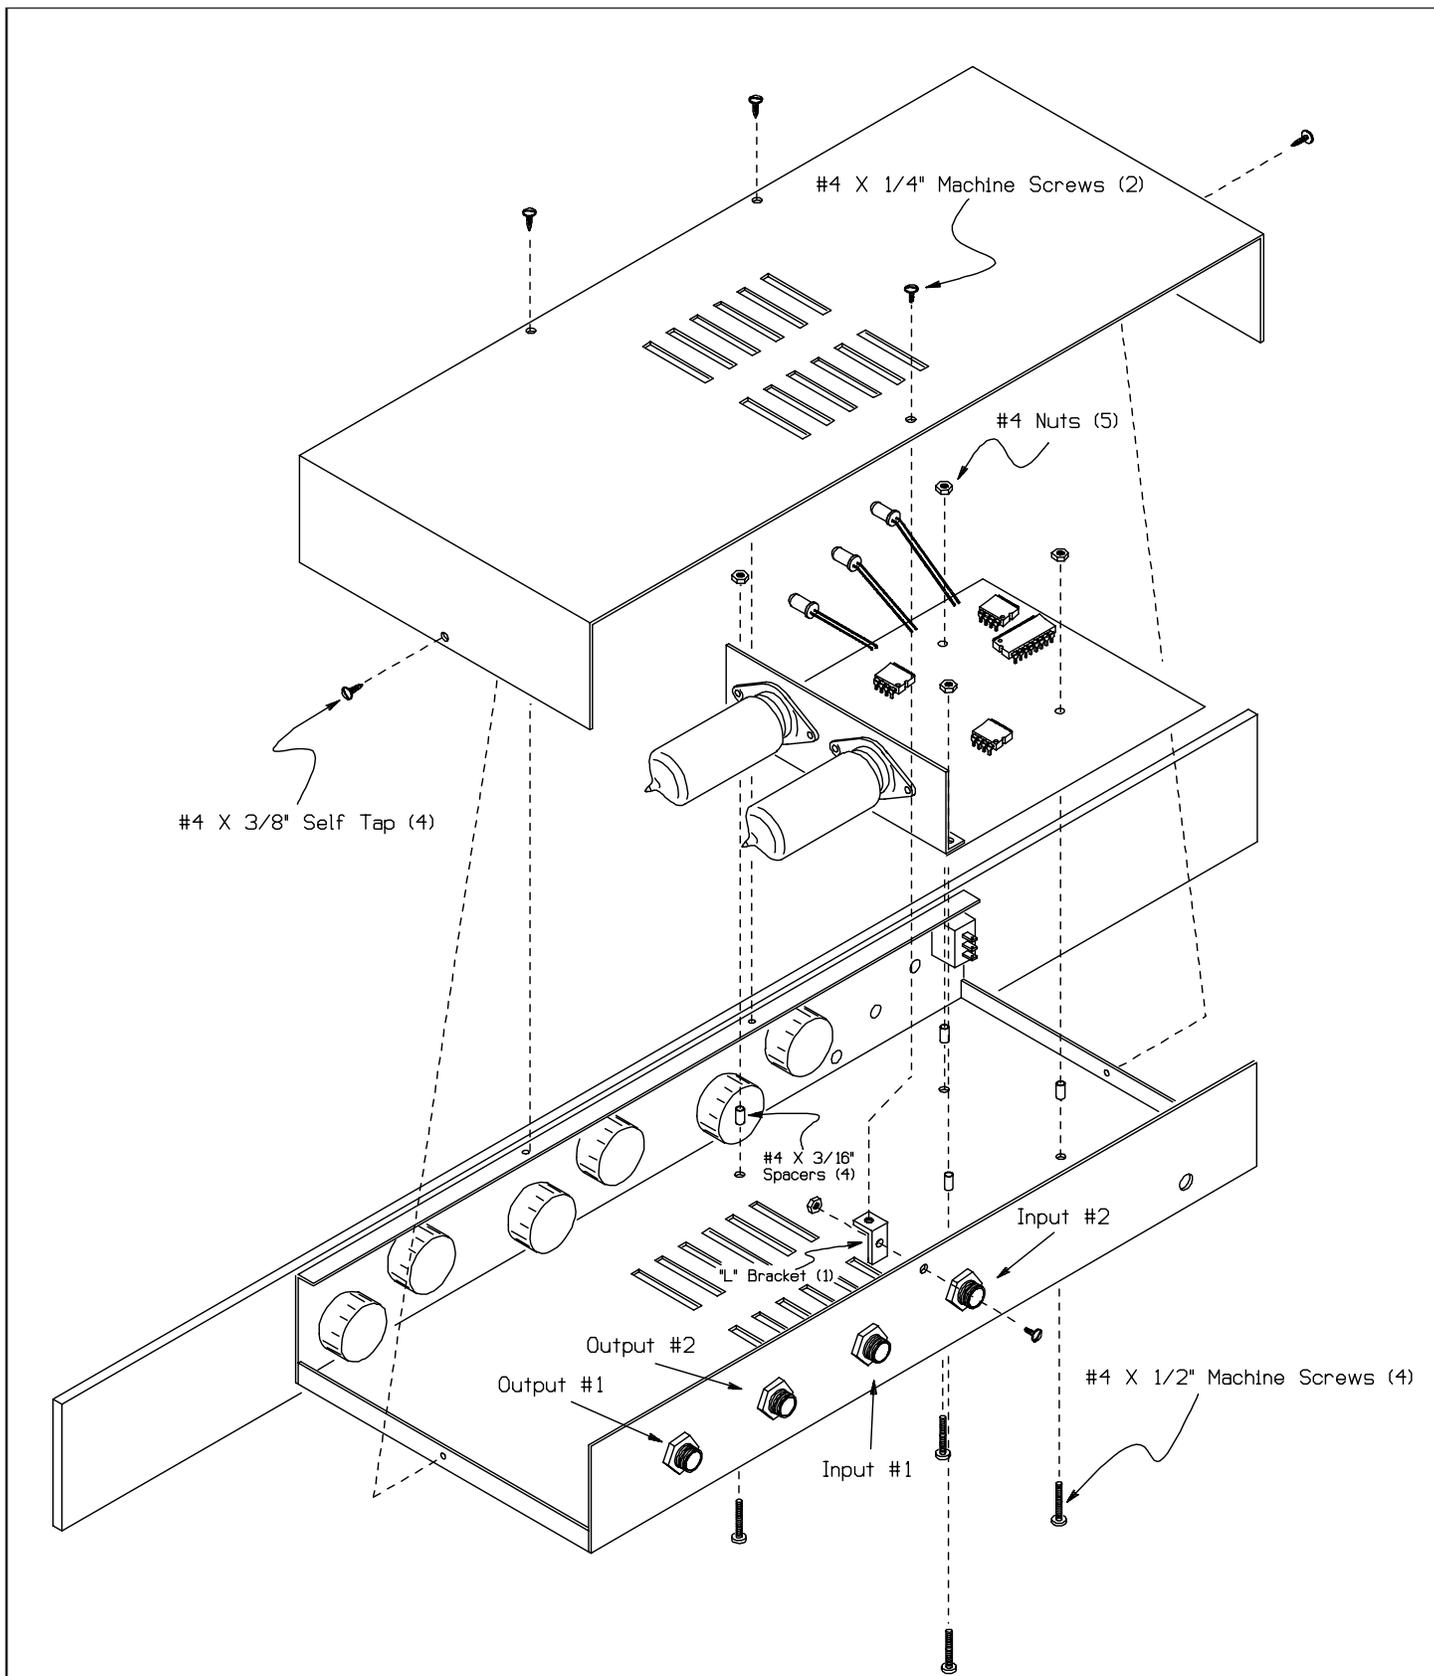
The Circuit Board mounts in the Case Bottom using 3/16" aluminum standoffs, 1/2" Screws and Nuts. Two of the Screws also hold the Tube Bracket in place.
